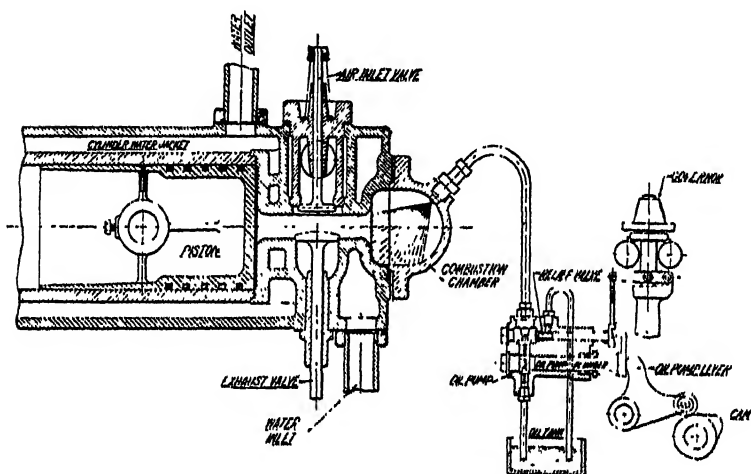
SECTION THROUGH COMBUSTION CHAMBER OF SEMI-DIESEL ENGINE.
